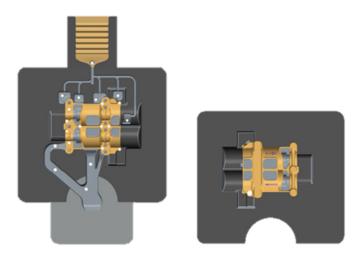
Models of the die used to produce the balance shaft housing. All die faces contacted by the liquid aluminum were coated [2,3]
